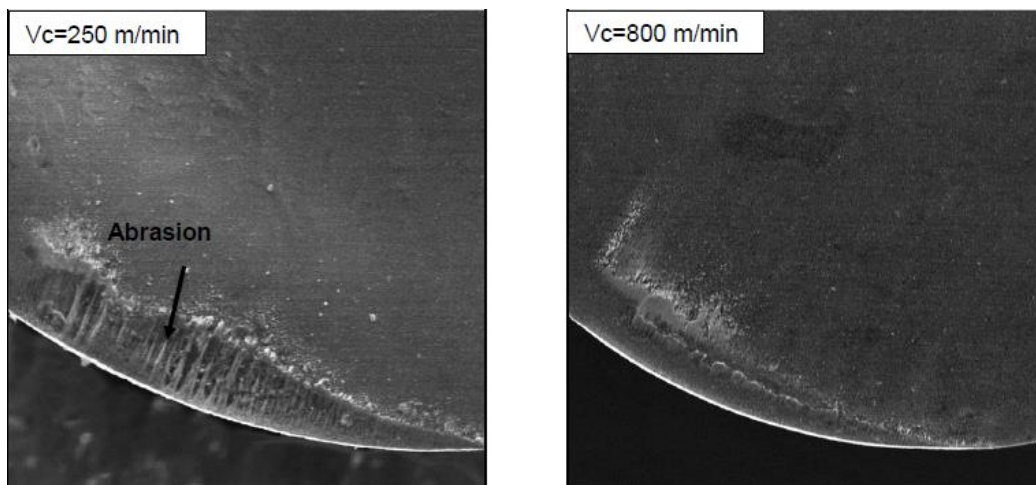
SEM images of tool rake face. Left one is low cutting speed, right one is high cutting speed. More abrasion wear appears on low cutting speed CBN rake face.
